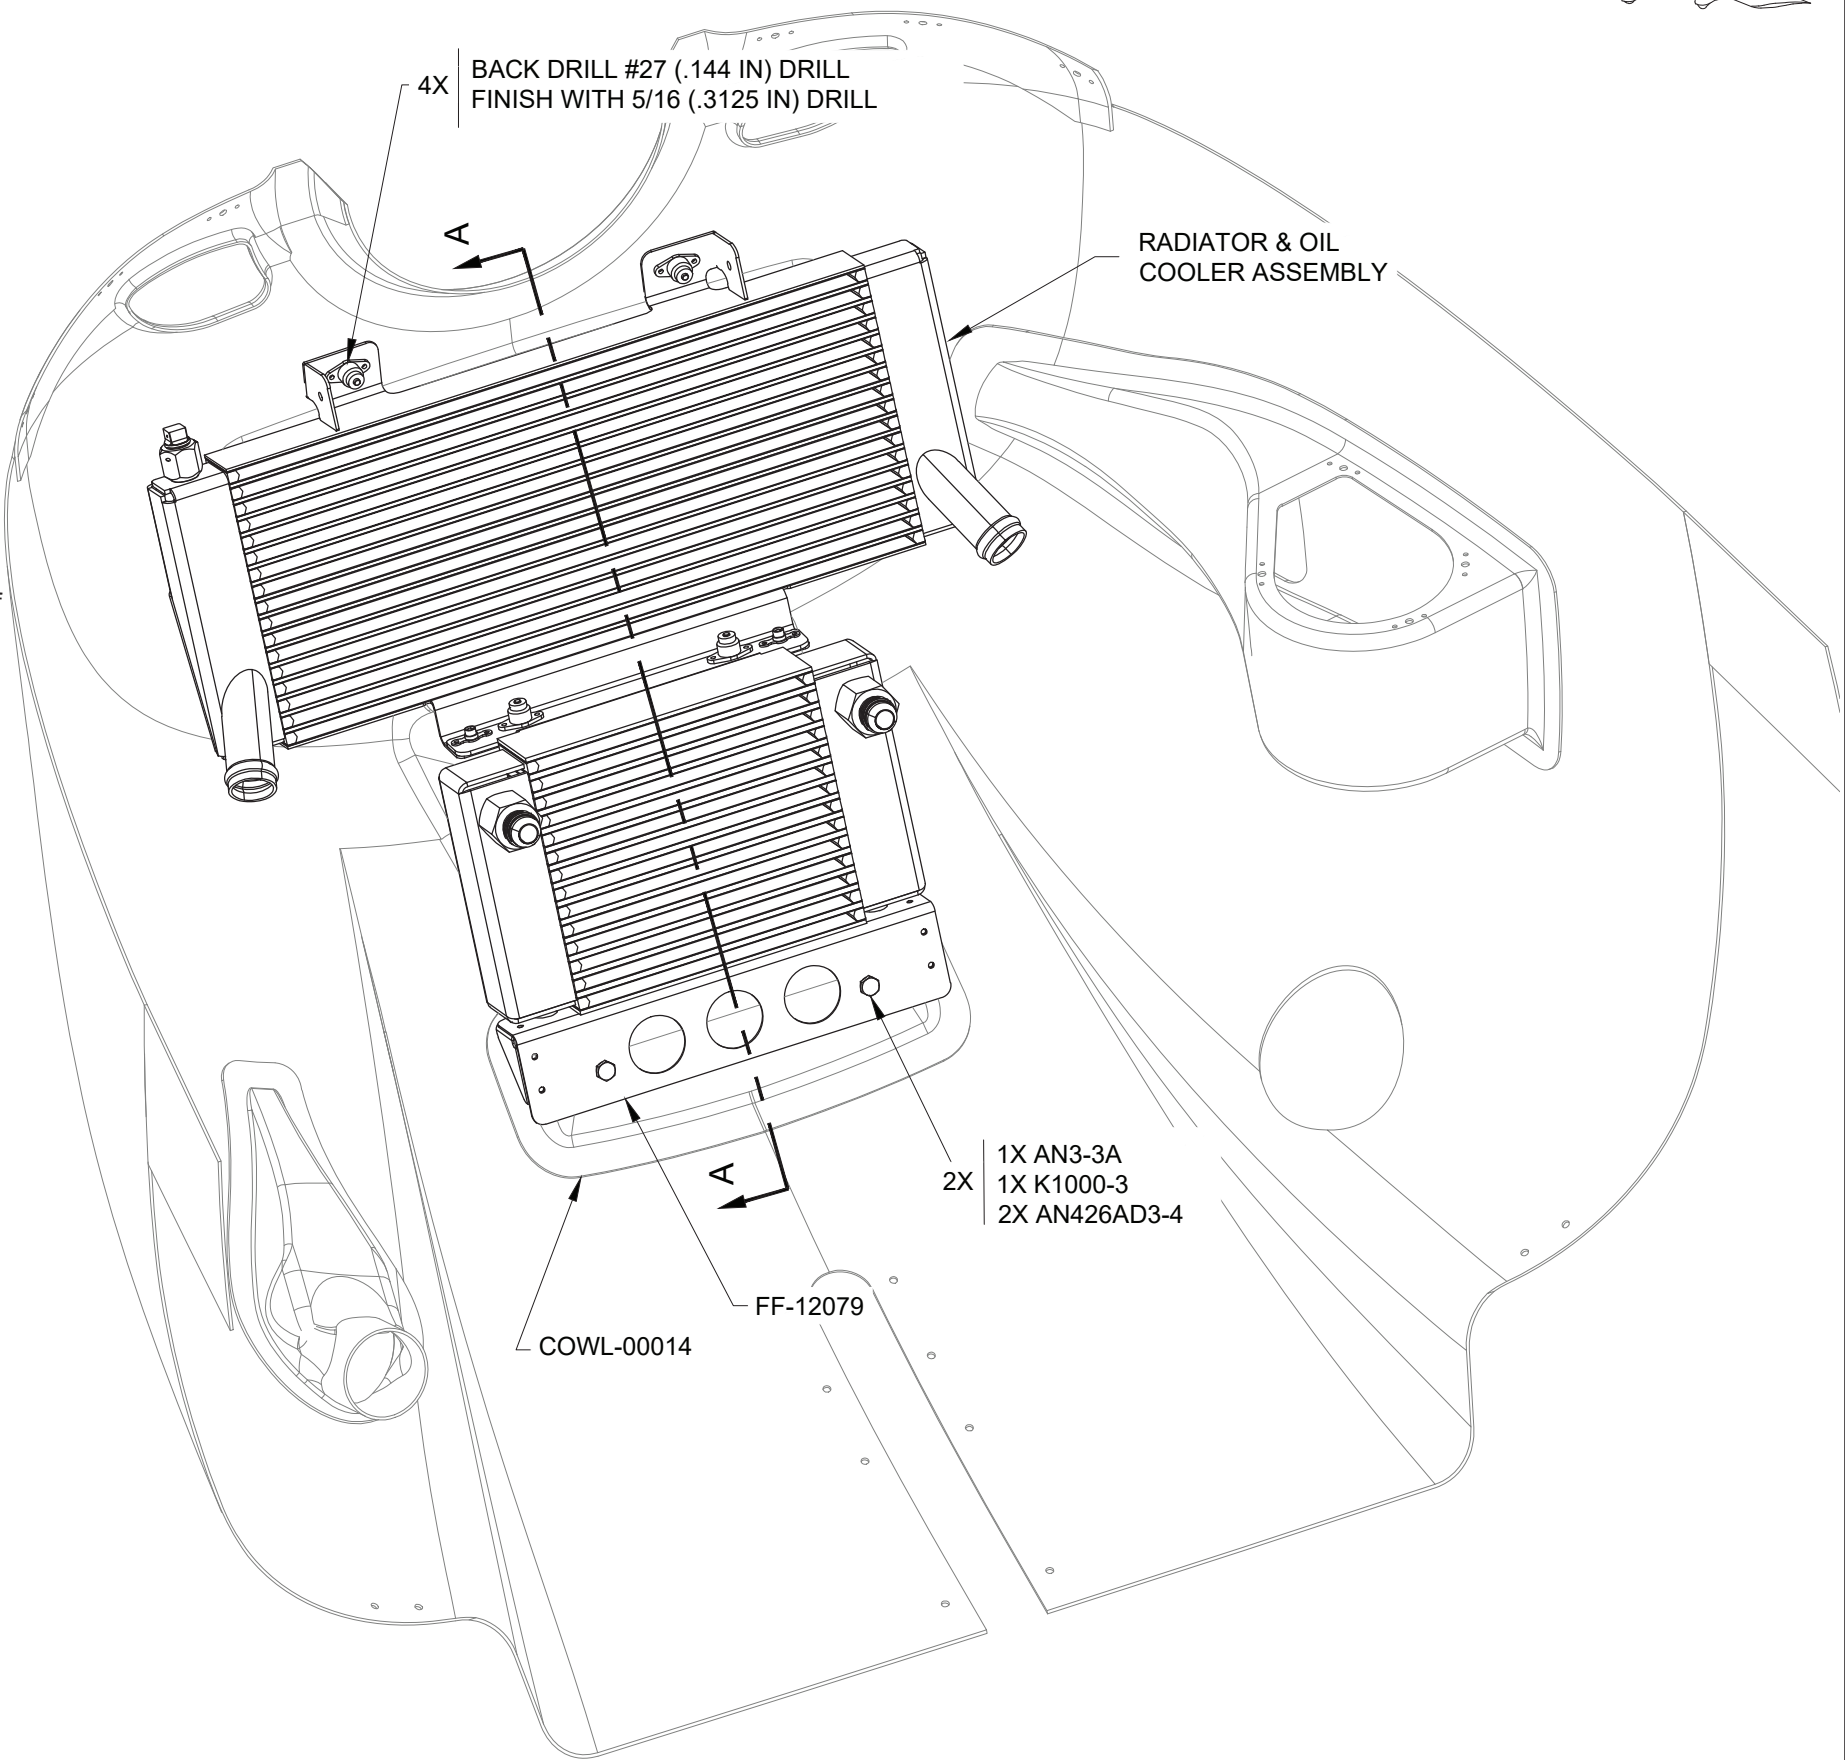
ATTACH RADIATOR & OIL COOLER ASSEMBLY TO COWL
